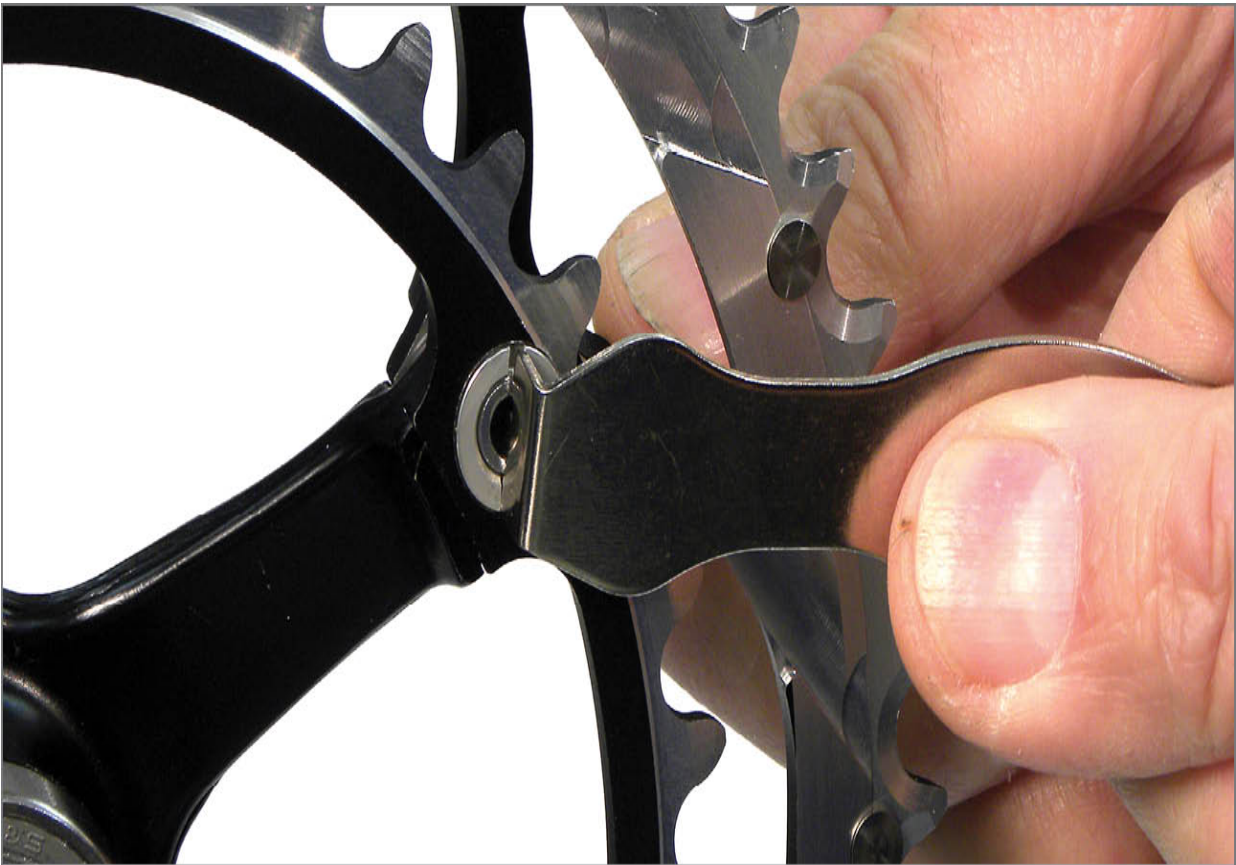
Use chainring nut wrench behind chainring to hold nut when turning bolt in the front
